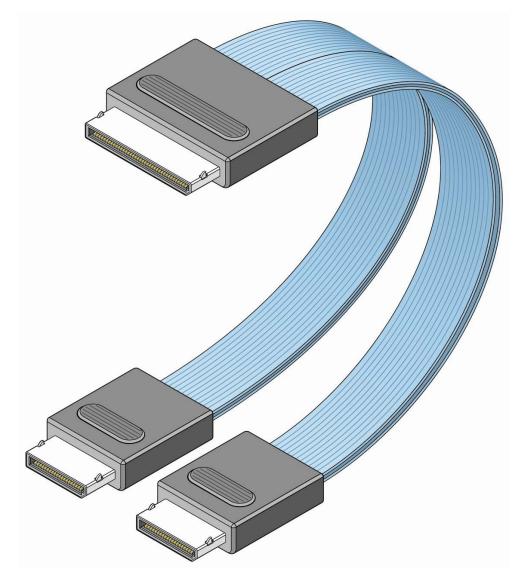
8X TO (2) 4X FREE CABLE ASSEMBLIES
